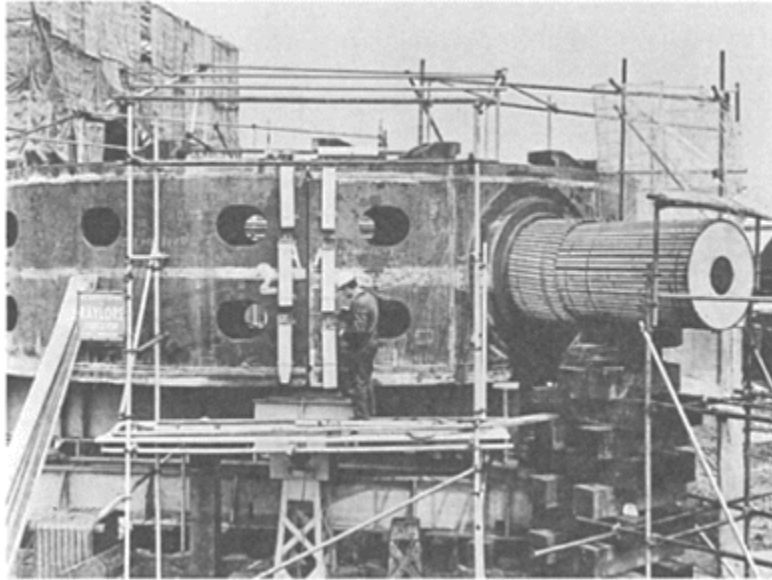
Site welding of the closing seam in the trunnion ring for a large basic oxygen steel-making furnace. The figure shows the seam being prepared for preheat and subsequent stress relief.
